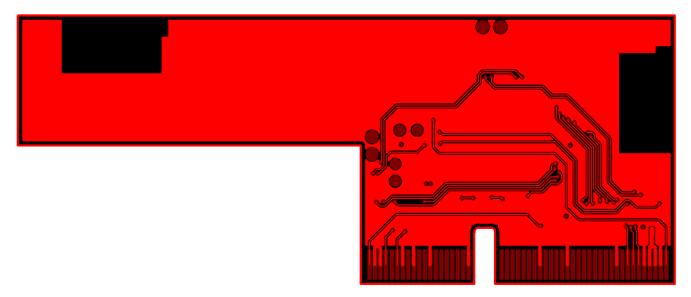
WL1837MODCOM8I Layer 4 Layout
